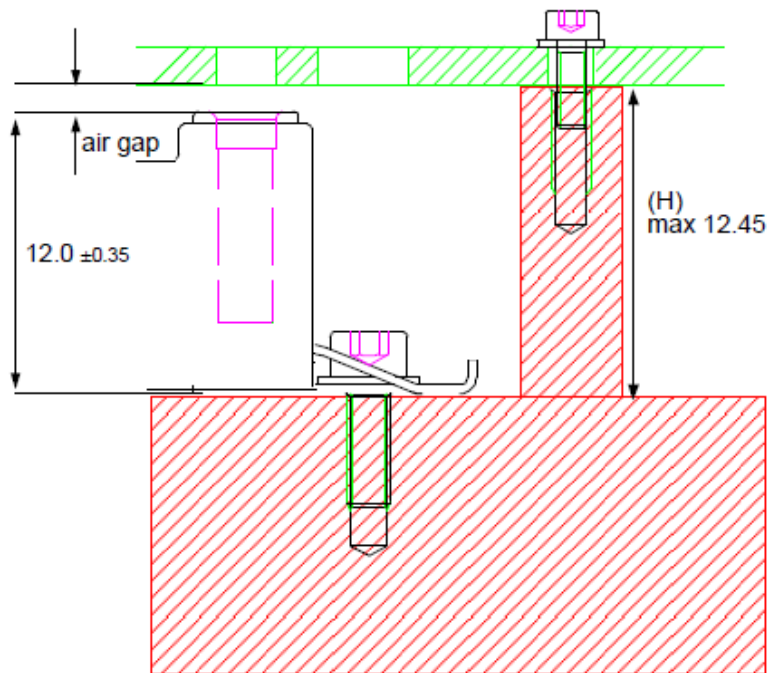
Mounting example of the PCB and module to the cooling system (drawing not true to scale)
